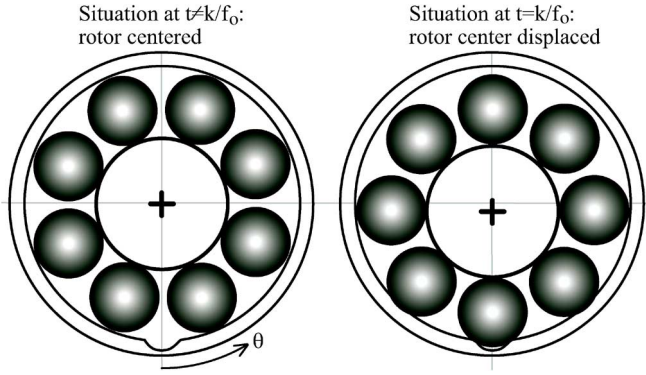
Radial rotor movement due to an outer bearing raceway defect.
